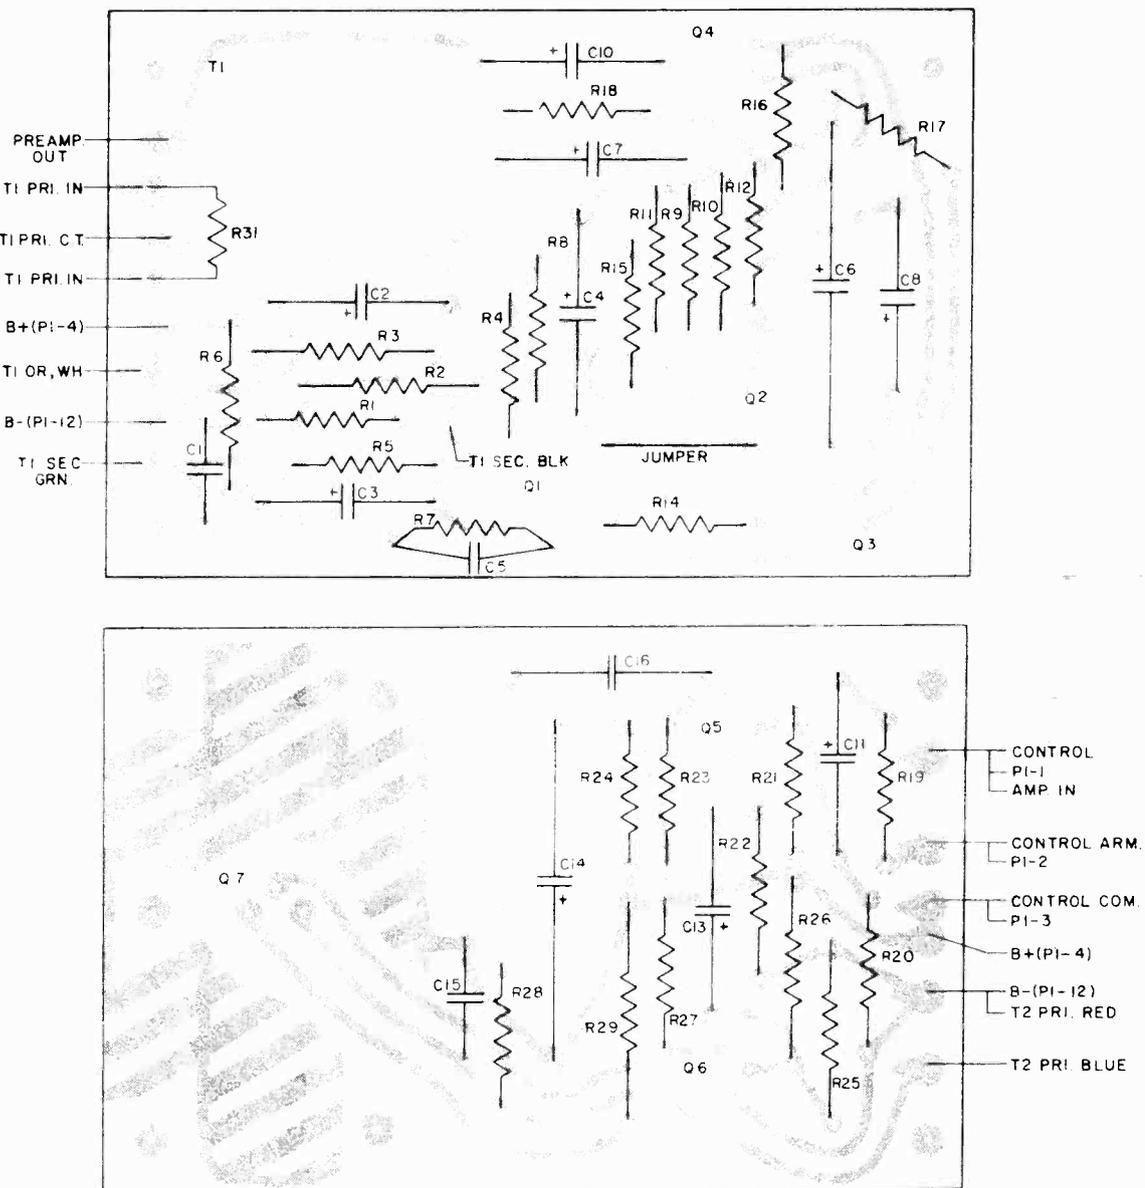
Printed Board Component Location, Viewed from Wiring Side.
